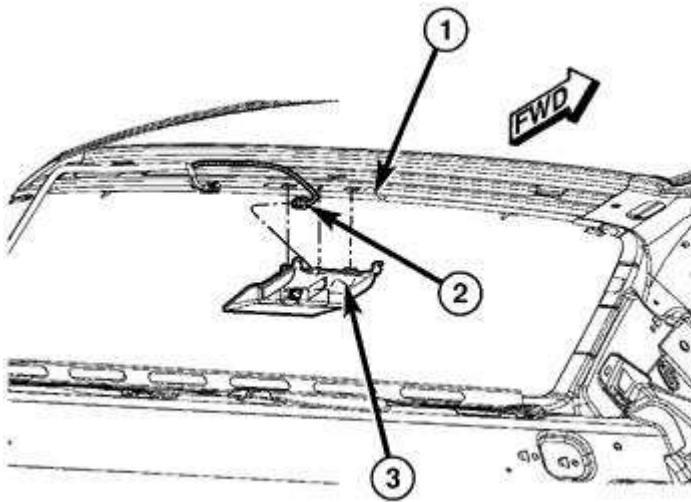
Identifying Ballast Module, Front Lamp Unit Housing & Screws
